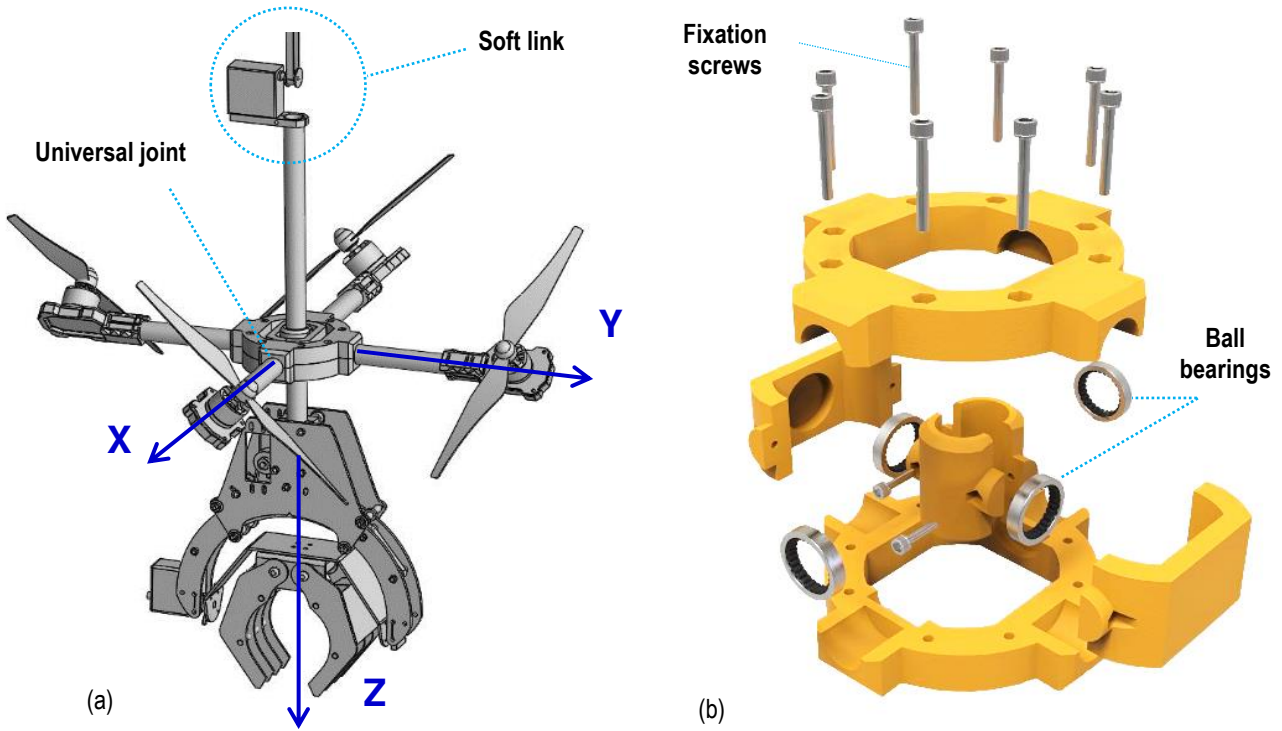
(a): The VTOL with the controllable multifunctional gripper which is connected to the UAV via a soft link. (b): The exploded view with the key parts of the universal joint.
